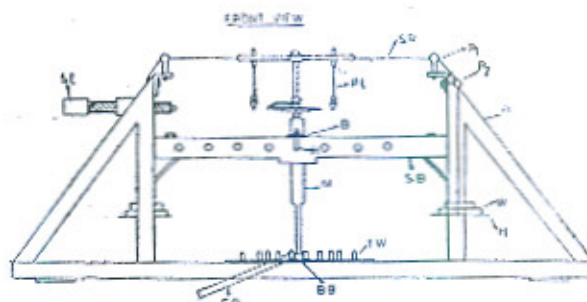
Sketch Drawing of Hardness Machine Calibrator Designed and Manufactured in I. R. I. Lahore
